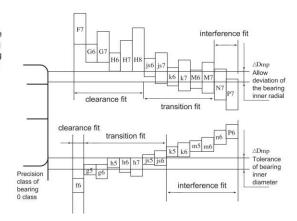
Shaft and shell fit relation of size tolerances (Class P0 precision for bearing)
